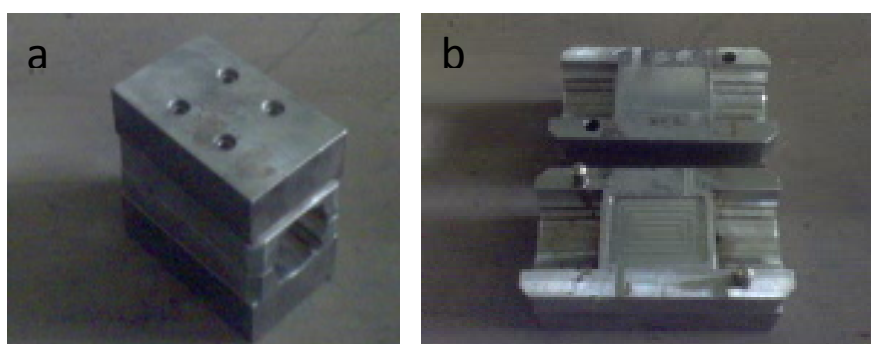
Photograph of a) Mould and b) Electro magnet for fabrication of MRE rods (Designed in house and fabricated by the author)
